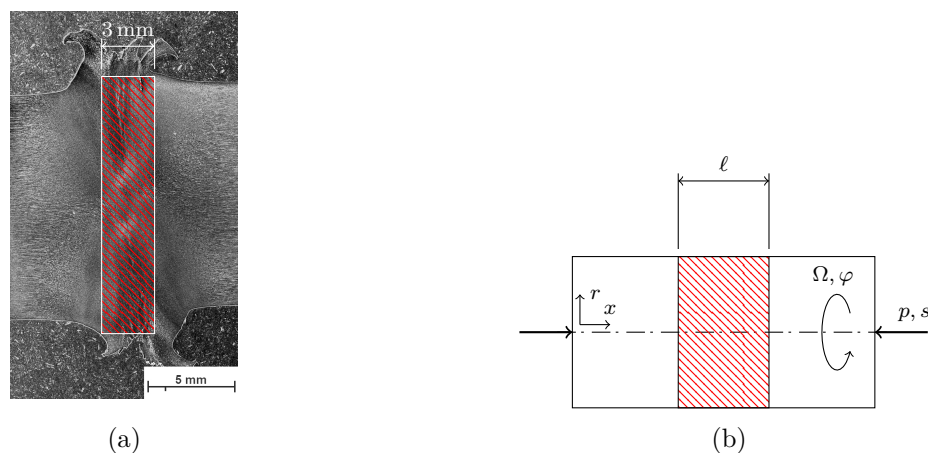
(a) 12 mm Mo rods welded with $2,750 \text{ min}^{-1}$ with the deforming zone indicated and (b) the schematic sketch of the deforming volume
